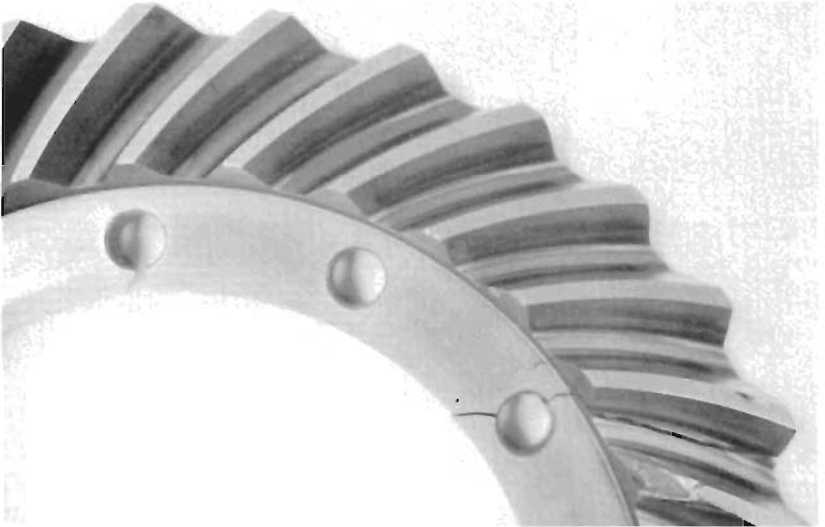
A foreign object (top of adjacent tooth) became enmeshed in spiral gear (0.5 \times) teeth causing a full section break. The top of the adjacent tooth also broke by impact from some object.
